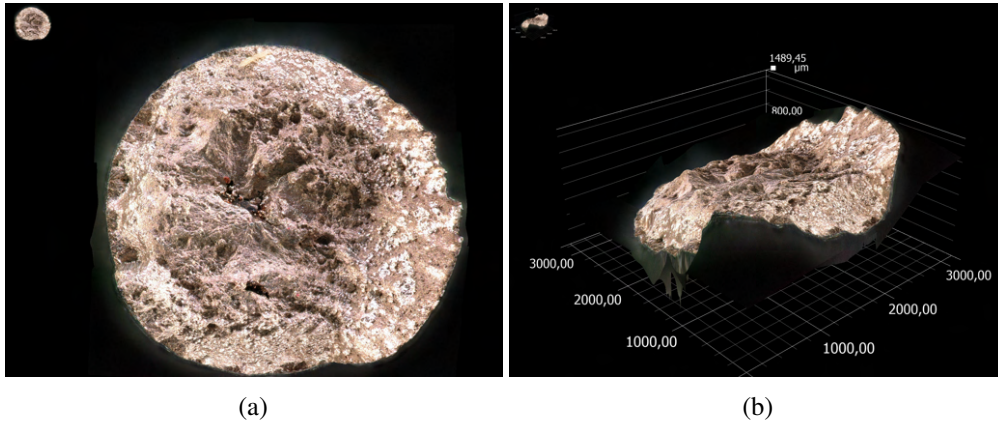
LCF $\Delta\epsilon = 1.0\%$ room temperature test fracture surface
